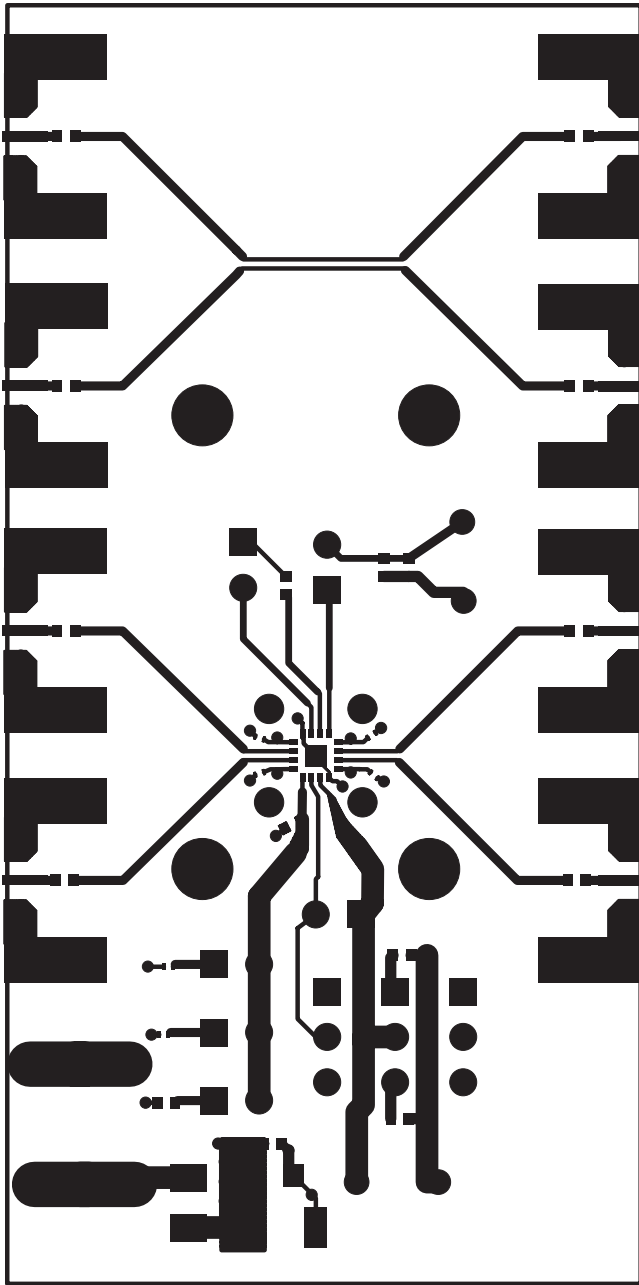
MAX3748H EV Kit PCB Layout—Component Side (2X)
